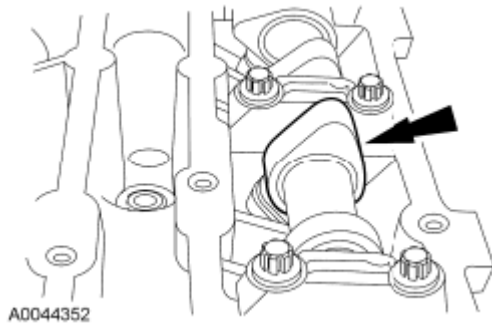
Locating Camshaft Lobe Position On No. 1 Cylinder
